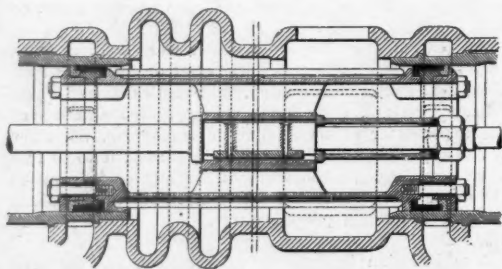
Hollow Valve Used on First Superheated Steam Locomotive.
